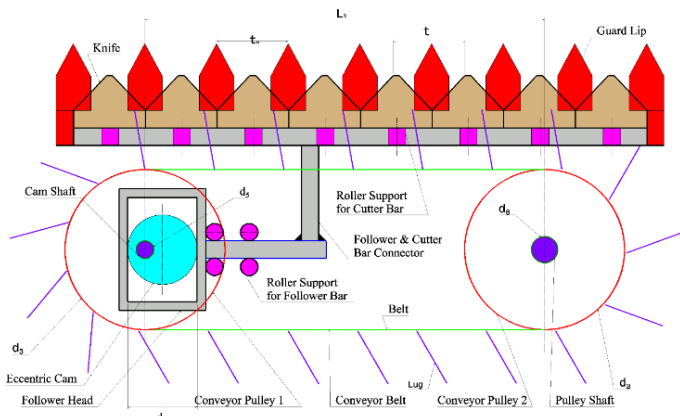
Basic Structure of Cutting and Conveying Mechanism
